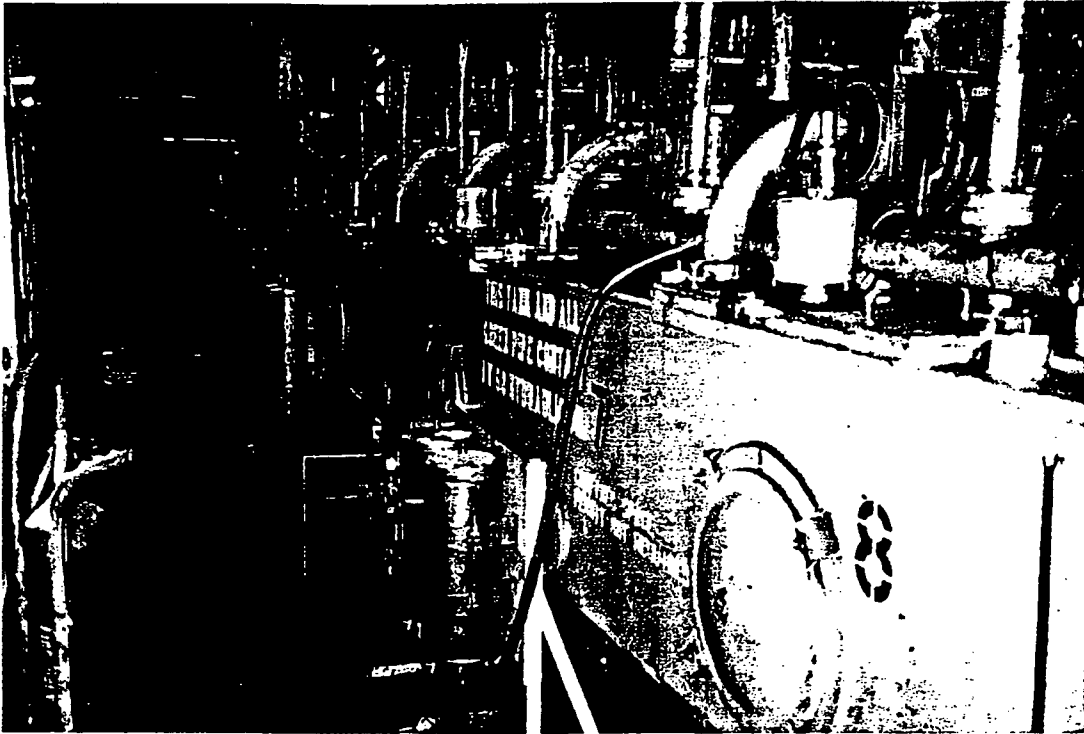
(#4) SHEAR EQUIPMENT HYDRAULIC OIL VESSEL
